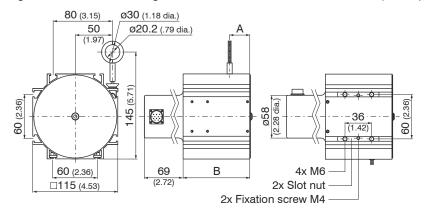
Dimensional drawing ... - FD115 - SSI, dimensions in mm (inches), not to scale
